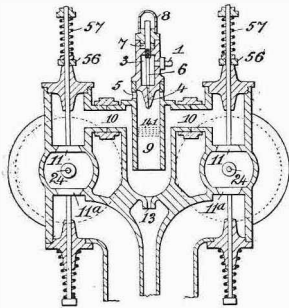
End section of double cylinder motor, showing single vaporiser serving both cylinders.
